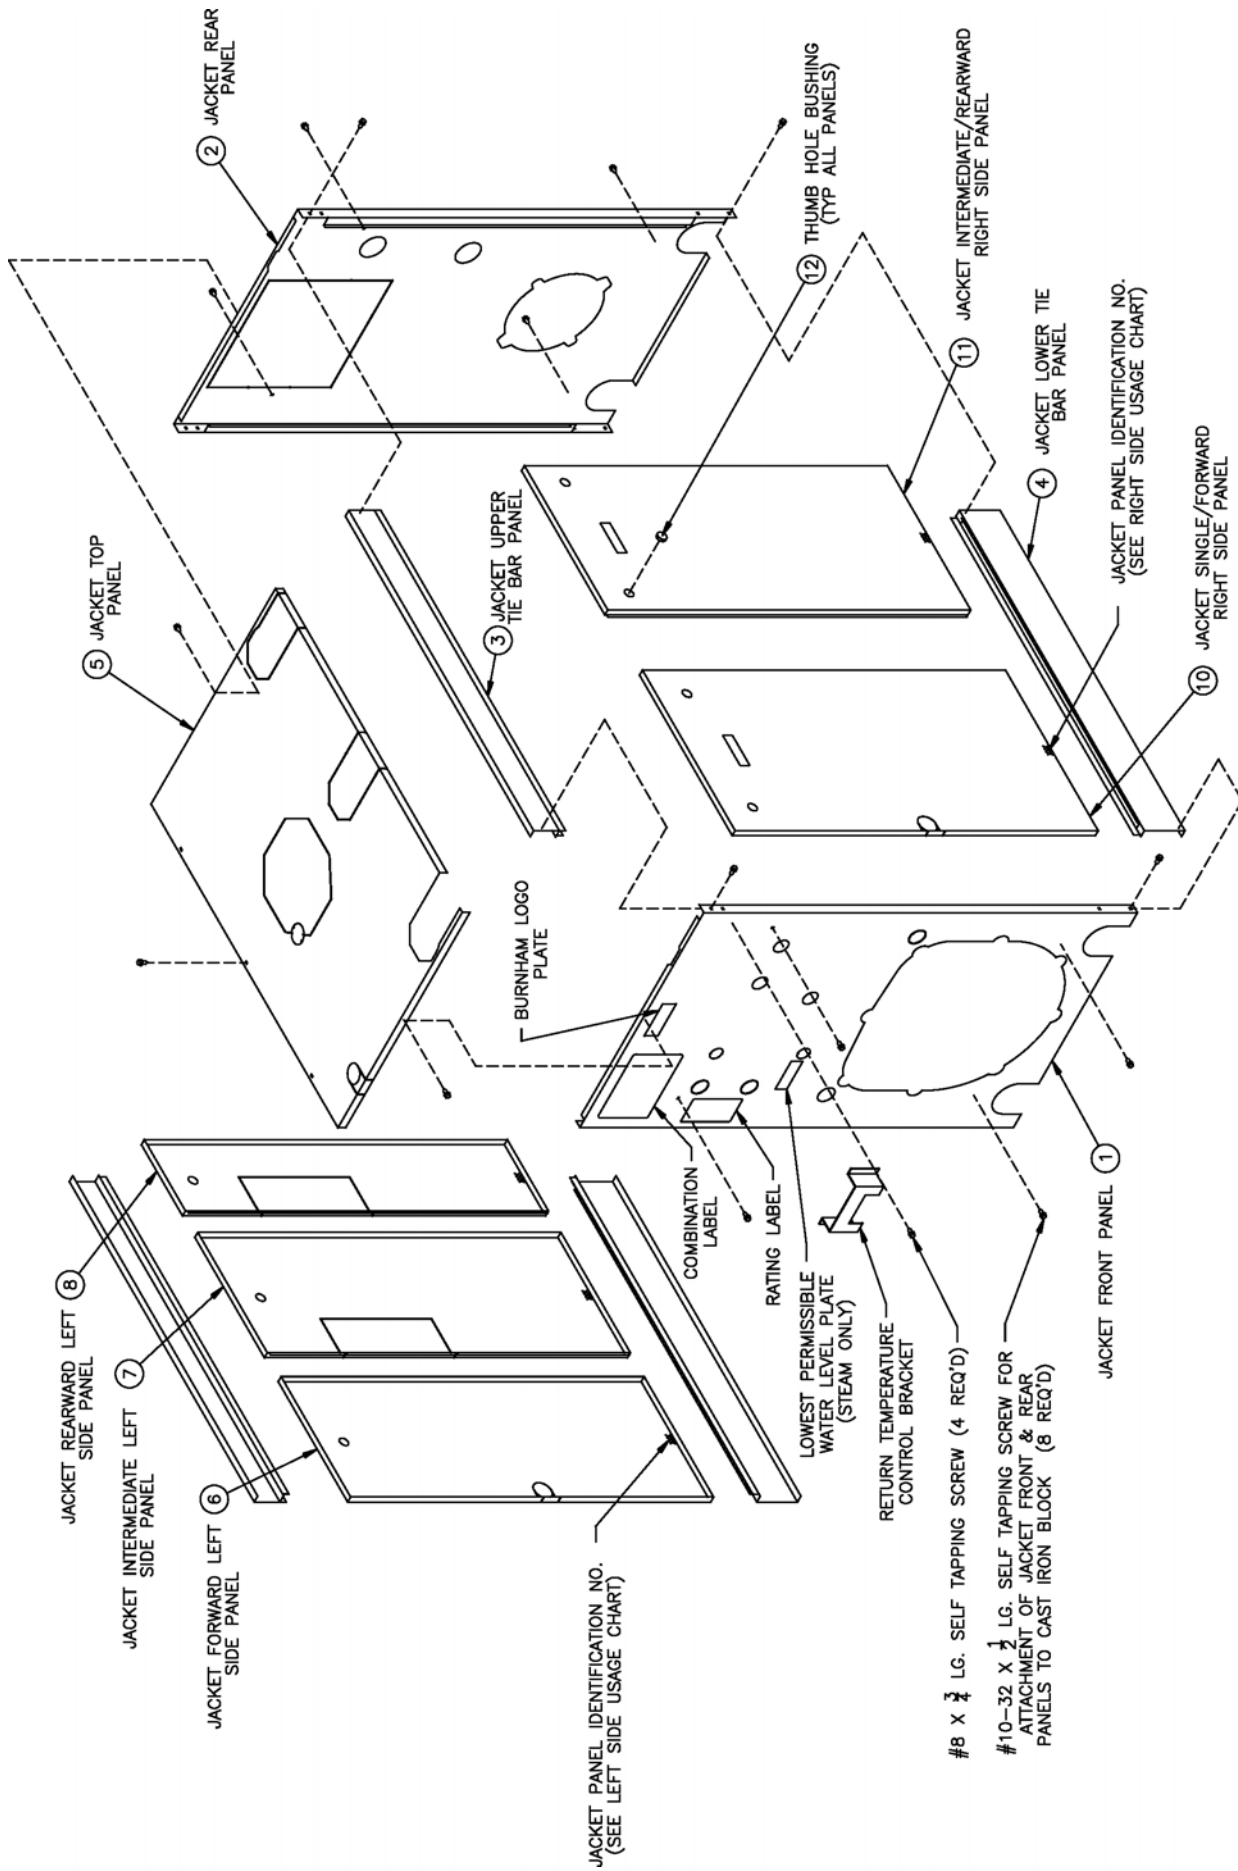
V9A Series Jacket Assembly (Boiler Models V903A thru V912A)
